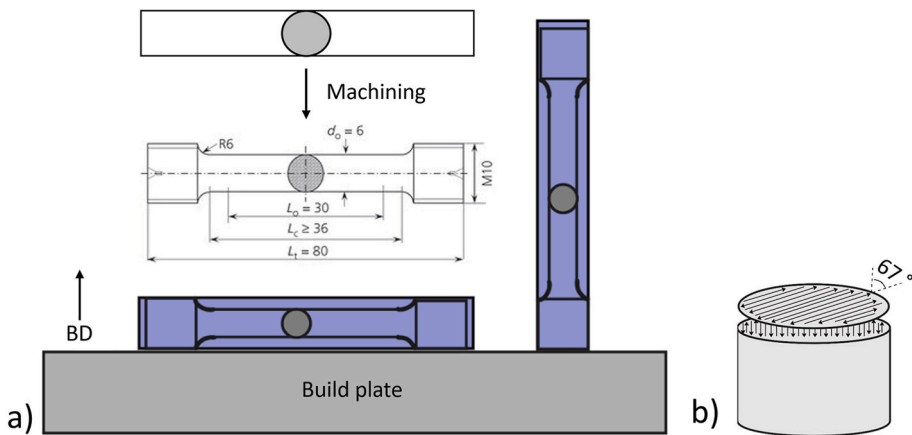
a) Sketch of the position of cylindrical blocks on build plate from which standard tensile bar specimens were machined (BD – build direction) and b) sketch of laser beam path showing rotation angle 67° at the next layer.
